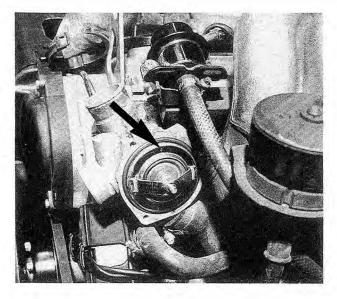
Thermostat correctly positioned in coolant outlet. Arrow shaped mark (arrow) must point up.
